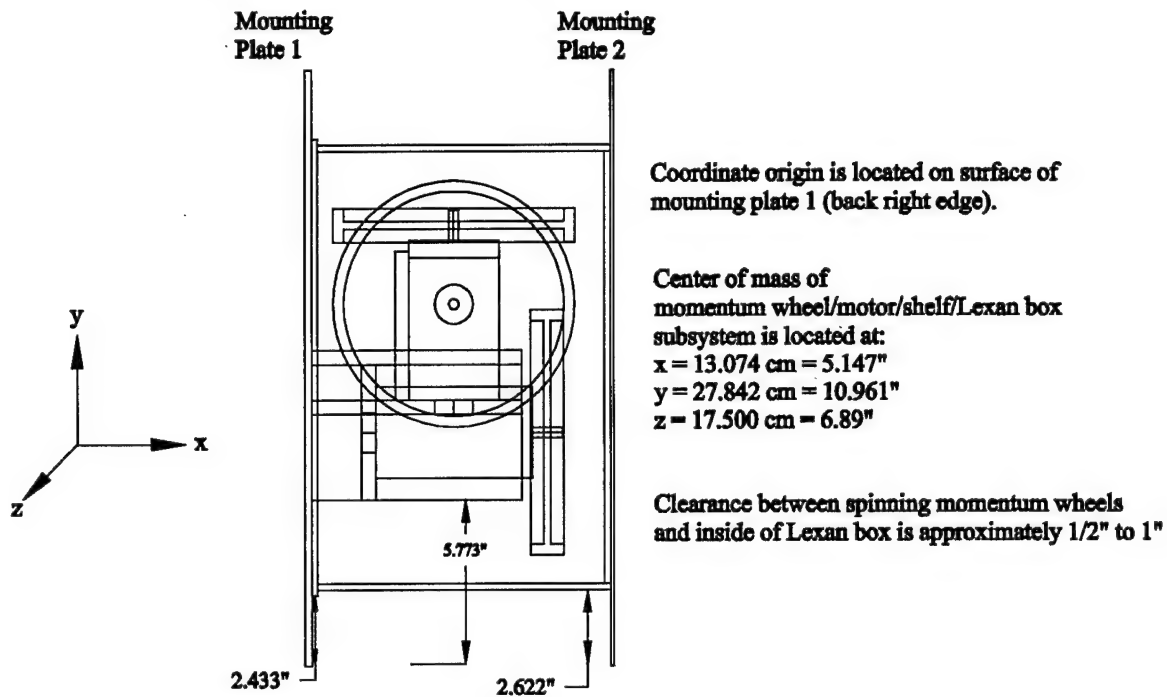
Counterweight Mechanism with Dimensions (Pegboard Not Shown)
